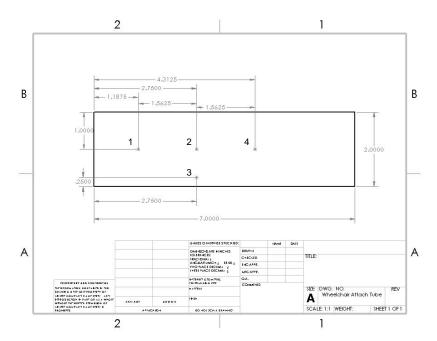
SolidWorks drawing of wheelchair attachment plate. Washers for turnbuckle attachment at positions 1,3, and 4. Washer for spring attachment at position 2.
